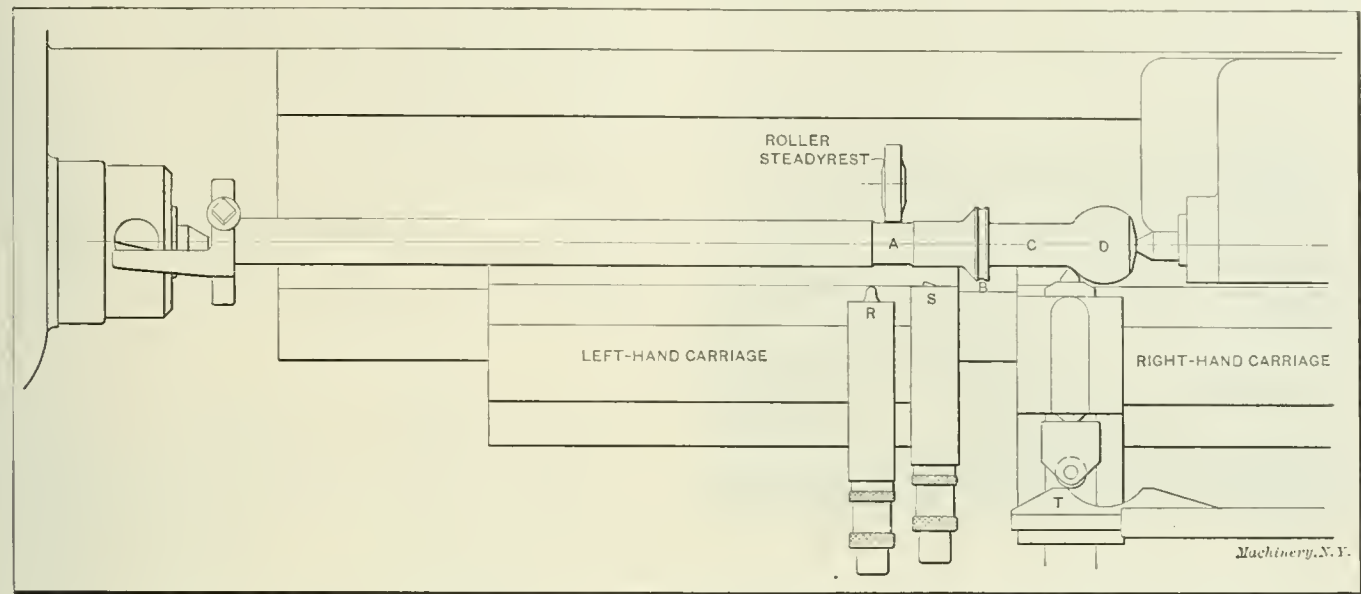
Diagrammatic View showing Tools and Spherical Turning Attachment used in Machining Automobile Propeller Shafts
